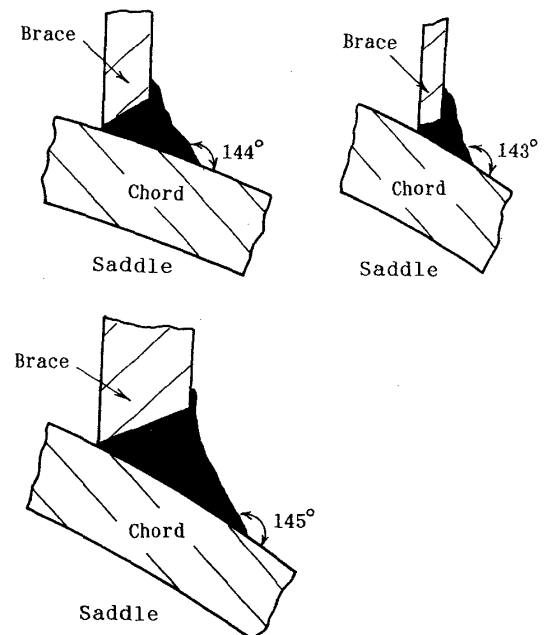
Weld Profiles for UKOSRP Fatigue Test Specimen
